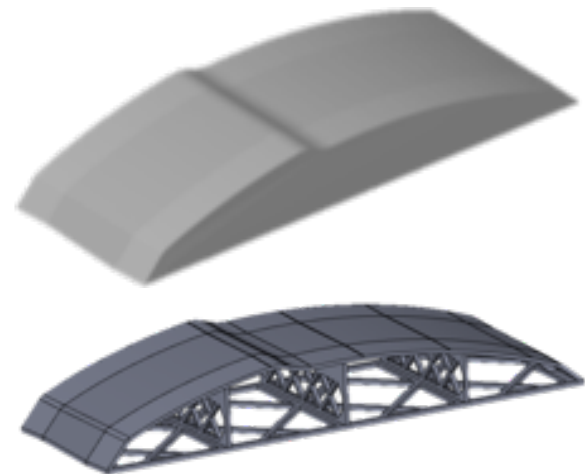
Medicine cabinet panel mold designs. Sparse style (top) and shell style (bottom).
